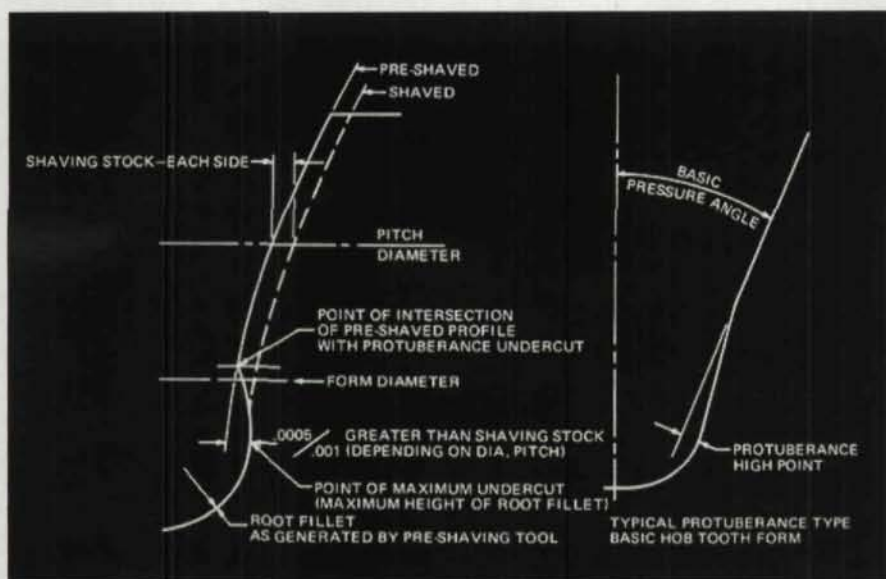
Undercut produced by protuberance hob and basic hob tooth form.
